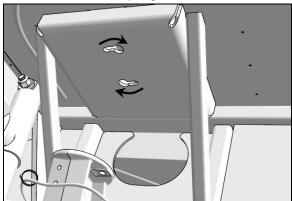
AIR SPRING UPPER MOUNTING PLATE
